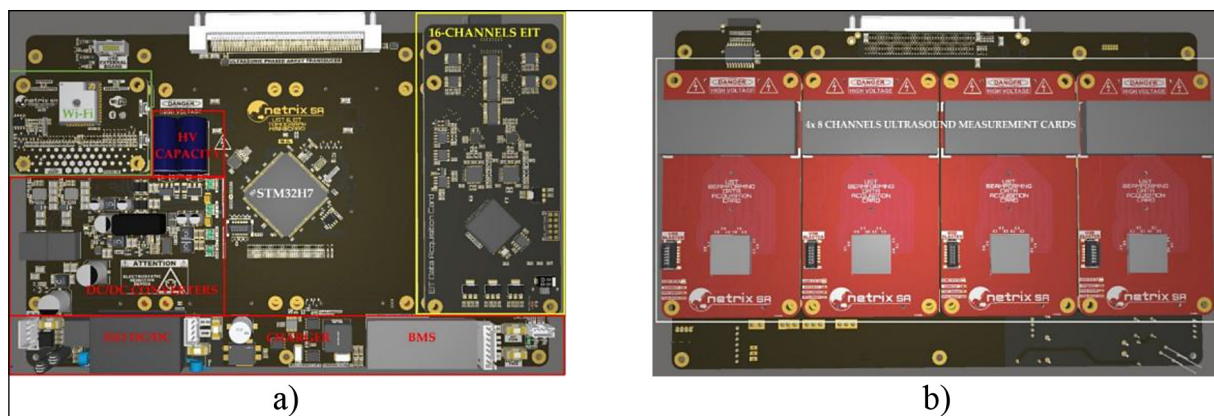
The final version of the main board for the tomograph monitoring the lower urinary tract: (a) top view, (b) bottom view
